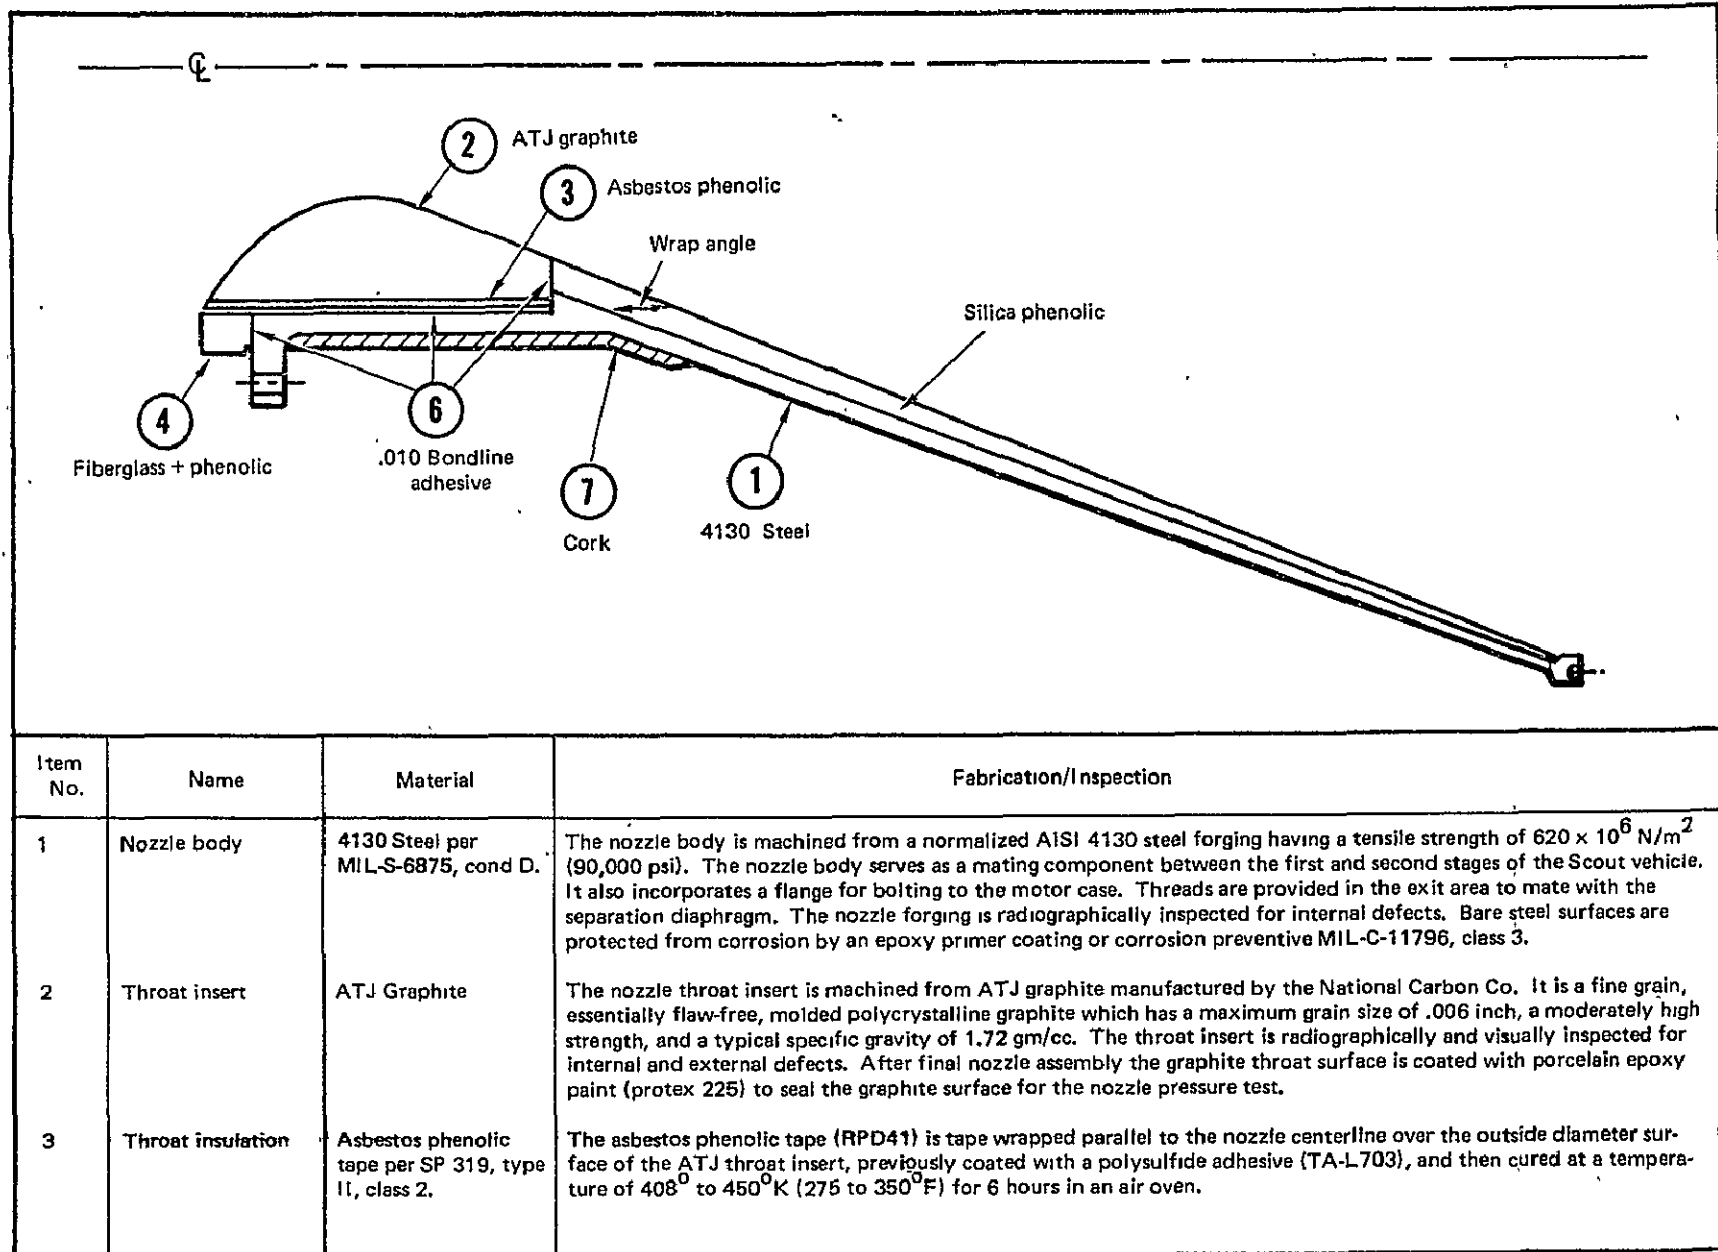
CASTOR II A FABRICATION AND INSPECTION - Continued
